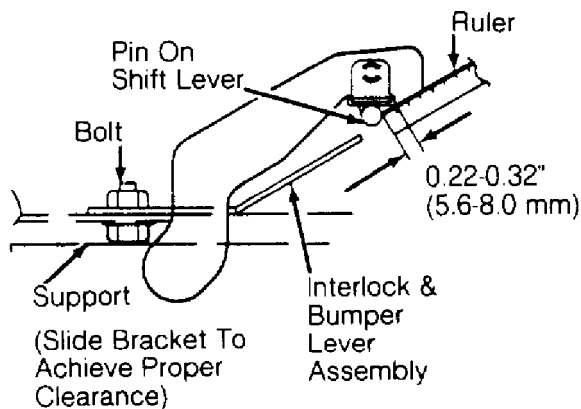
Adjusting Solenoid & Interlock Assembly (Off-Vehicle)
